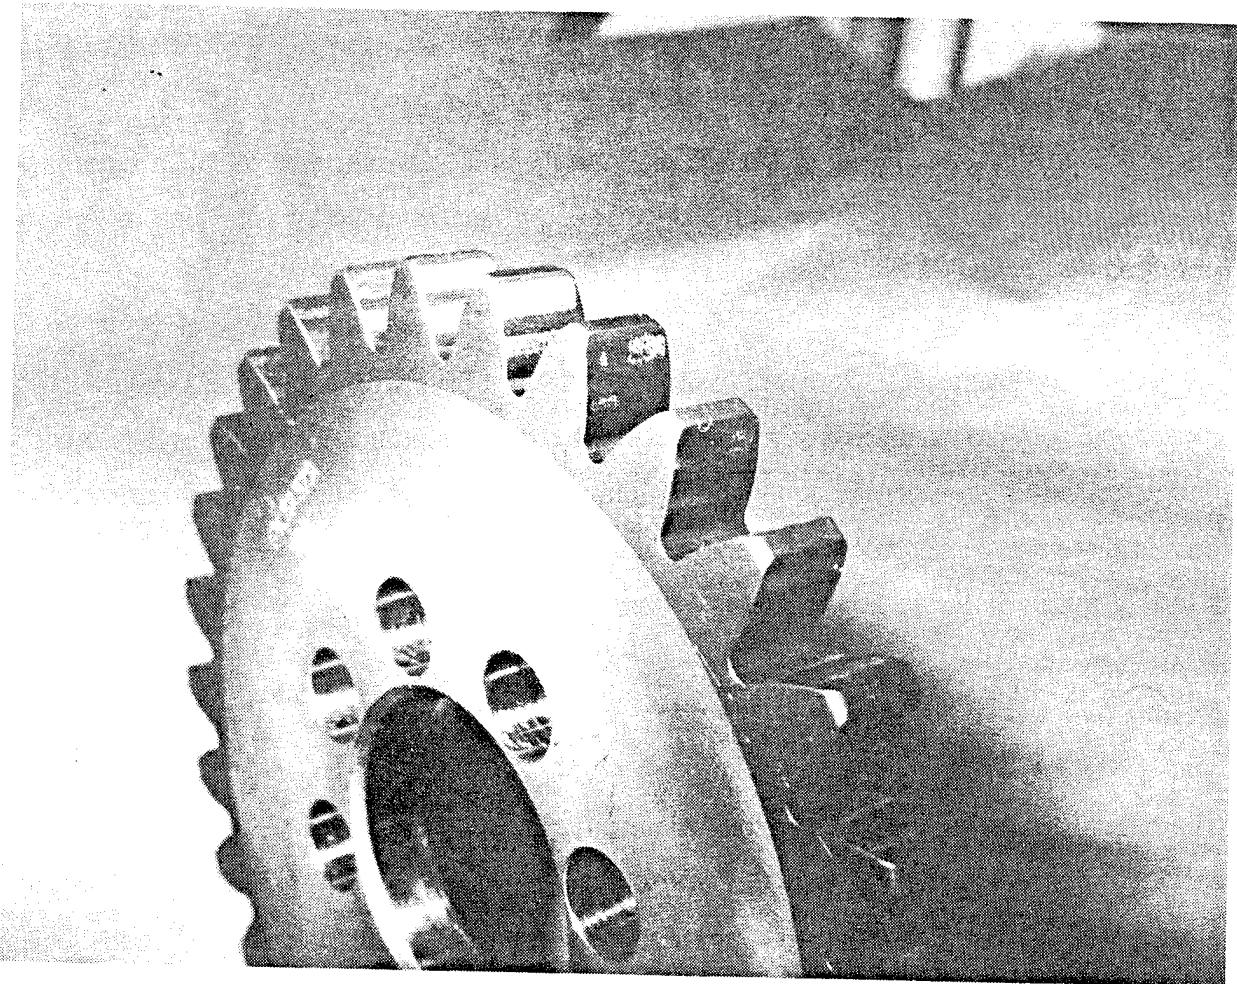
Scoring of Gear Hard-Coated by E/M Corporation
